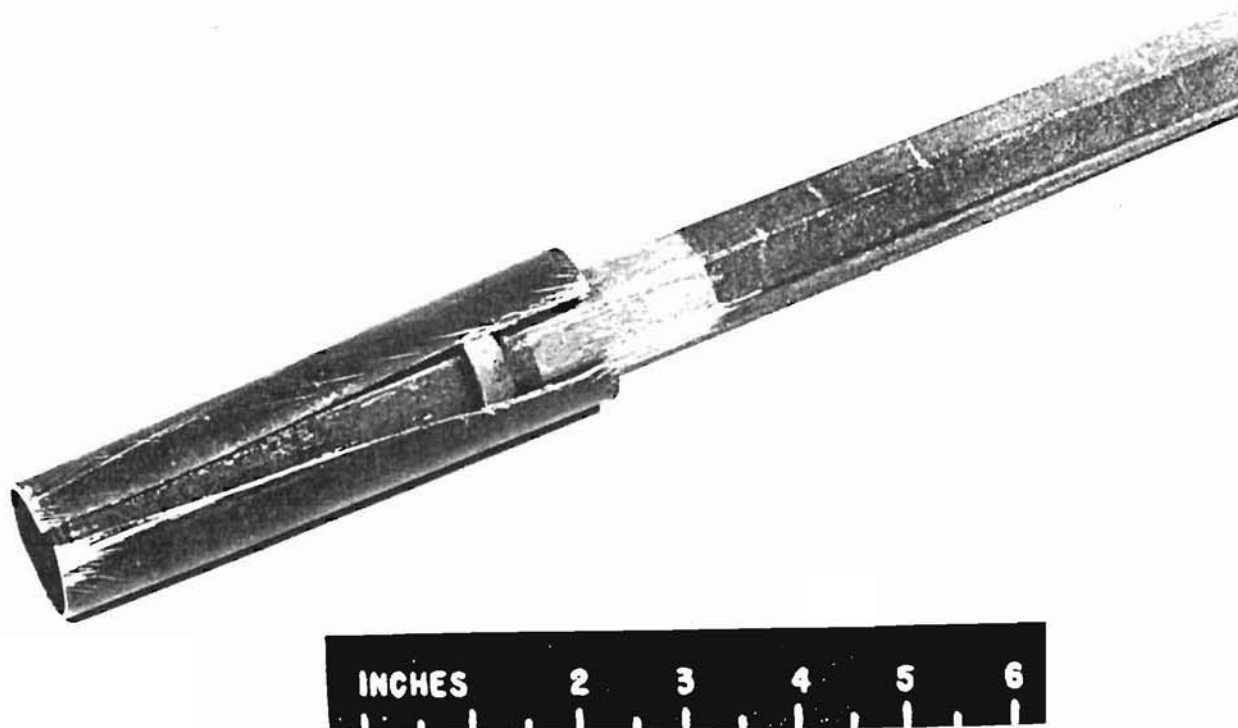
Installing a steel tube onto a shouldered drill rod.
